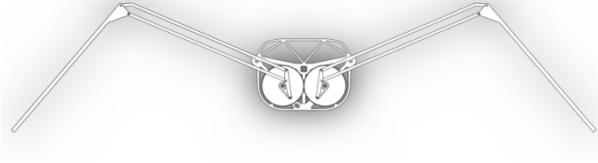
Schematic diagram of a two-segment flapping wing aircraft mechanism driven by a crank-rocker mechanism
